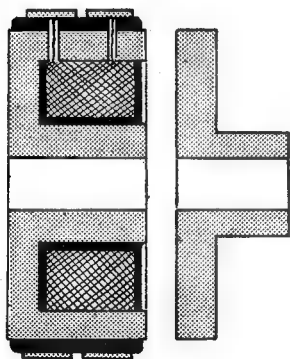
The "pot" magnet cover is simply made on the lathe, being circular in transverse section. Size about 1½ in. diameter
